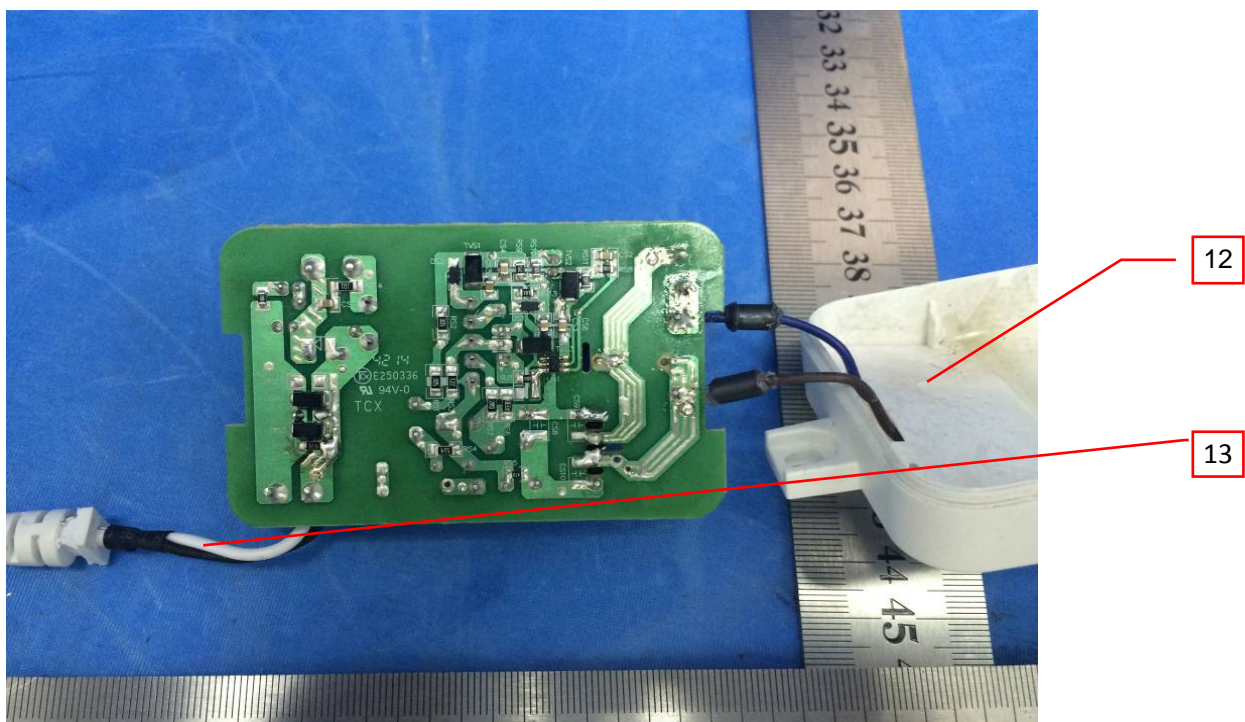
Soldering side view of PCB of model GT-41134-0606-W2-TAB(Third structure)
